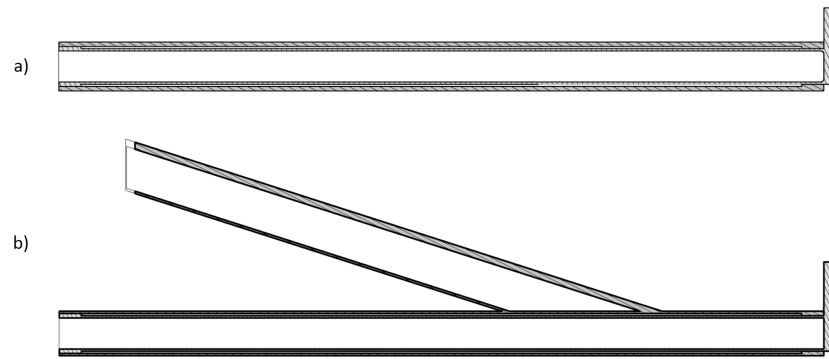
a) Initial and b) optimized design of B2IH mechanism (section view).
